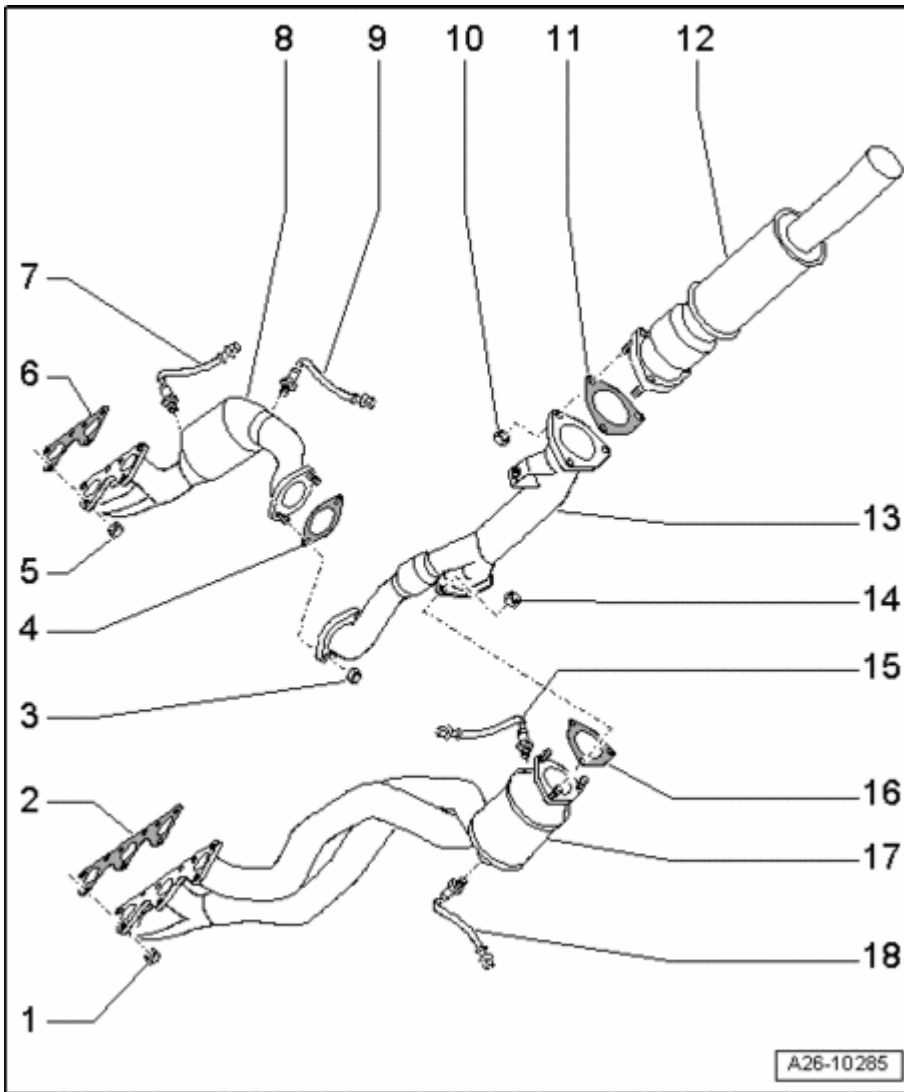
Exhaust System, Component Overview - Front Exhaust System
